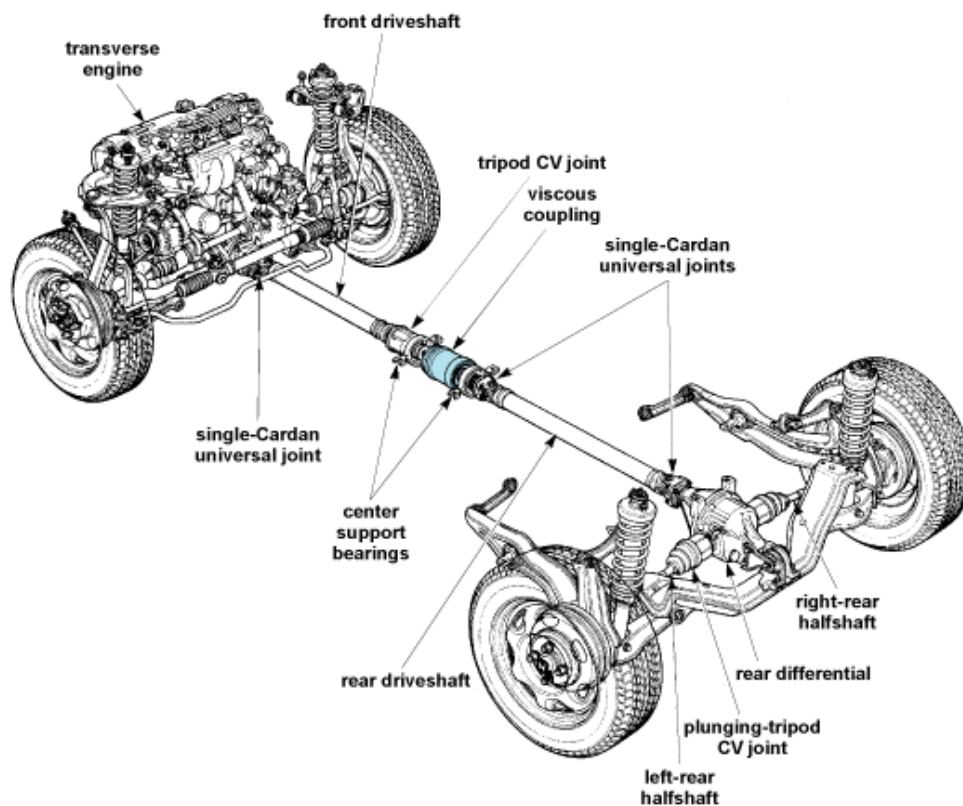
Typical drivetrain for a rear wheel driven passenger car. (Abhi, 2012)
